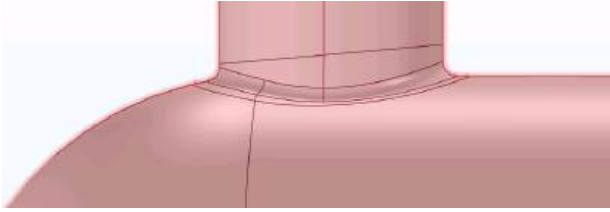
Collision of weldseams. One weldseam is between the hemispherical head and cylindrical part of the cryostat. The other weldseam is between cryostat and dome.
